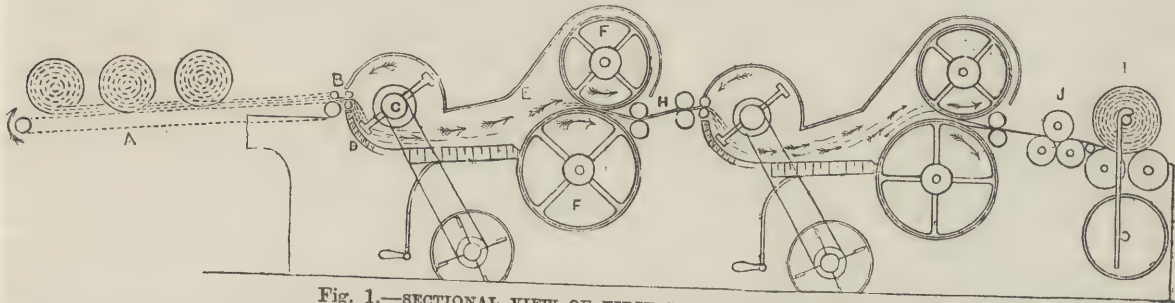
SECTIONAL VIEW OF FIRST SCUTCHING MACHINE.
